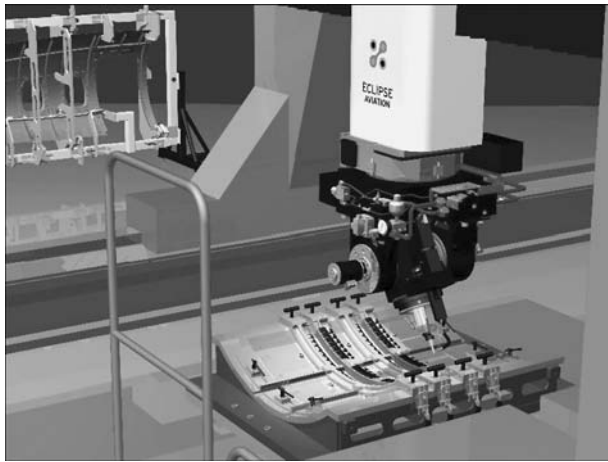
FSW of design components of «Eclipse 500» at the gantry machine tool (access mode: http://www.plm.automation.siemens.com/en_us/Images/Eclipse-fsw_tooling_tcm1023-21267.jpg)
